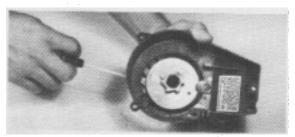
Check pull cord for proper spring pressure. If spring pressure is weak and an adjustment will not work (Fig. 3), it will be necessary to have dealer replace spring.
